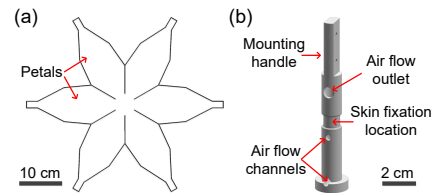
(a) Laser-cutting patterns for the fabric skin; and (b) CAD model of the connector.
